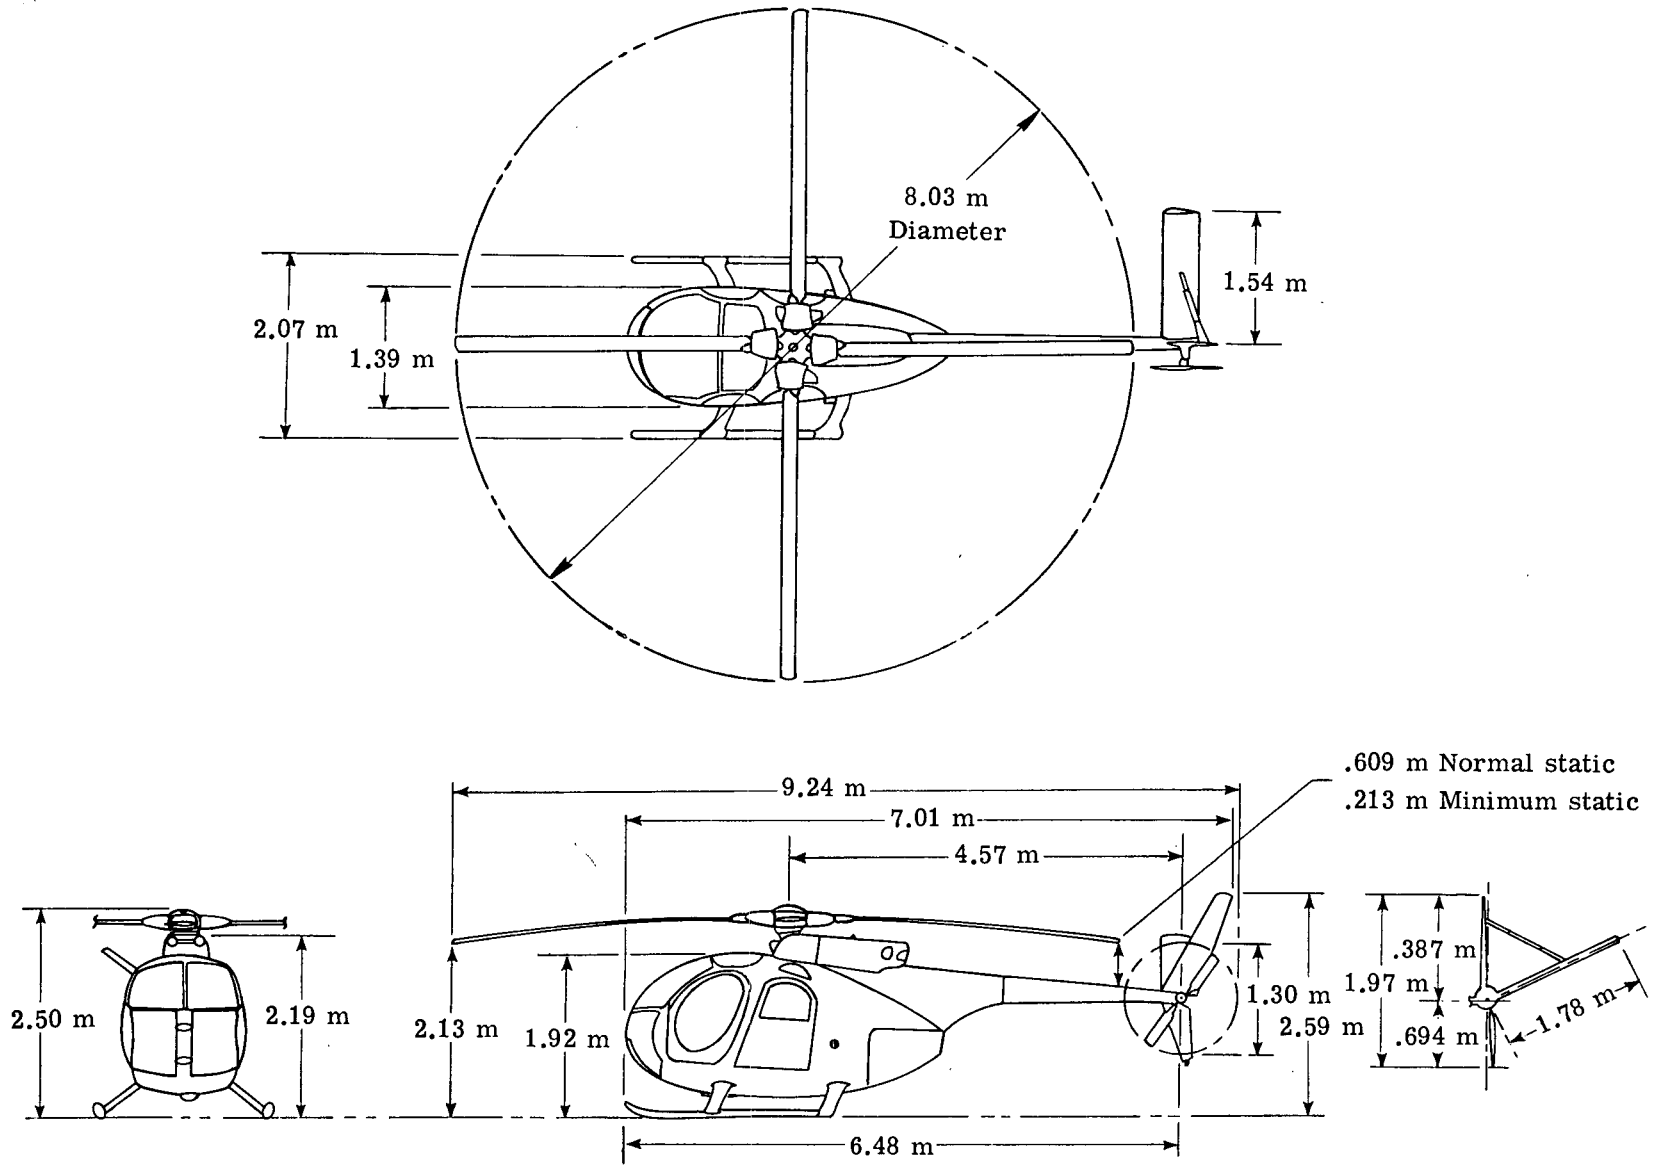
Three-view drawing of the Hughes OH-6A turbine helicopter. Configuration A.
